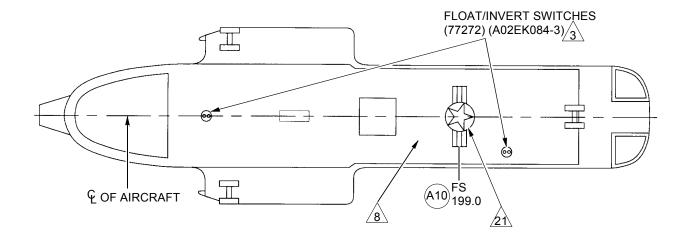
External Marking and Insignia, CH-46E HMX-1 (Sheet 1 of 5)
